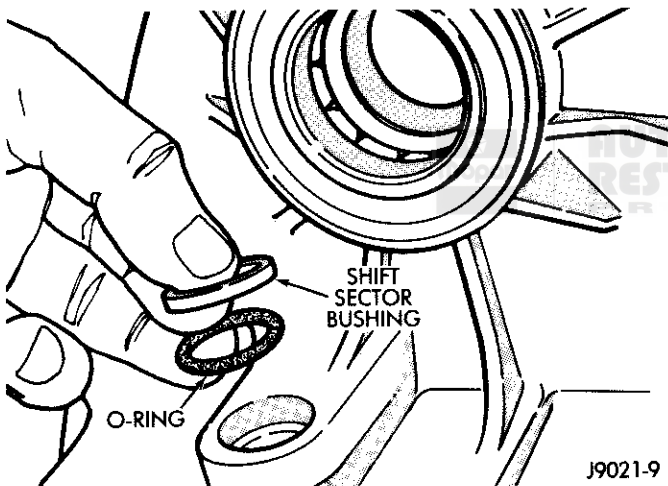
Removing/Installing Sector Shaft Bushing And O-Ring
